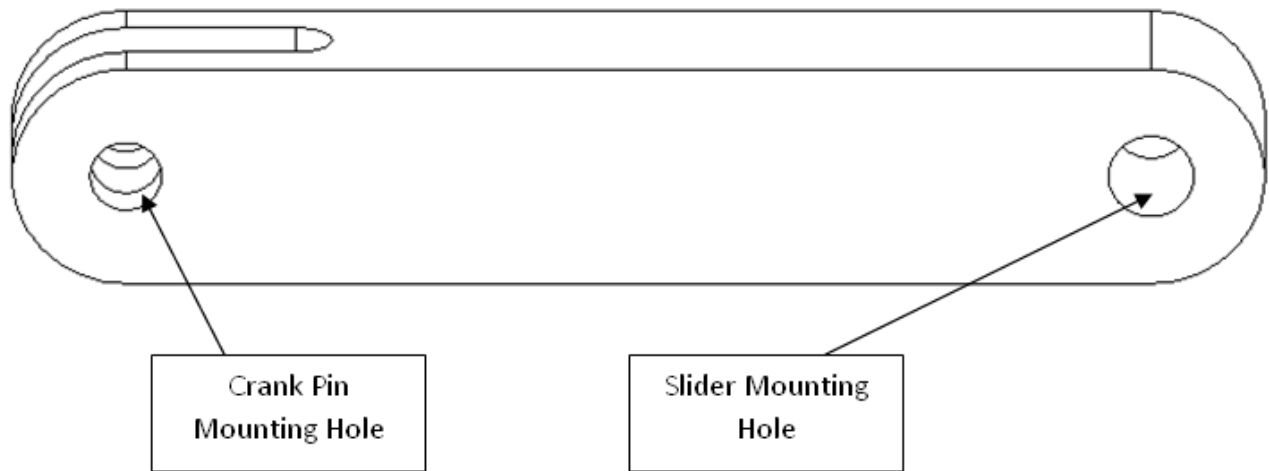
Connecting Rod Geometry for Cam-Servo Test Machine
